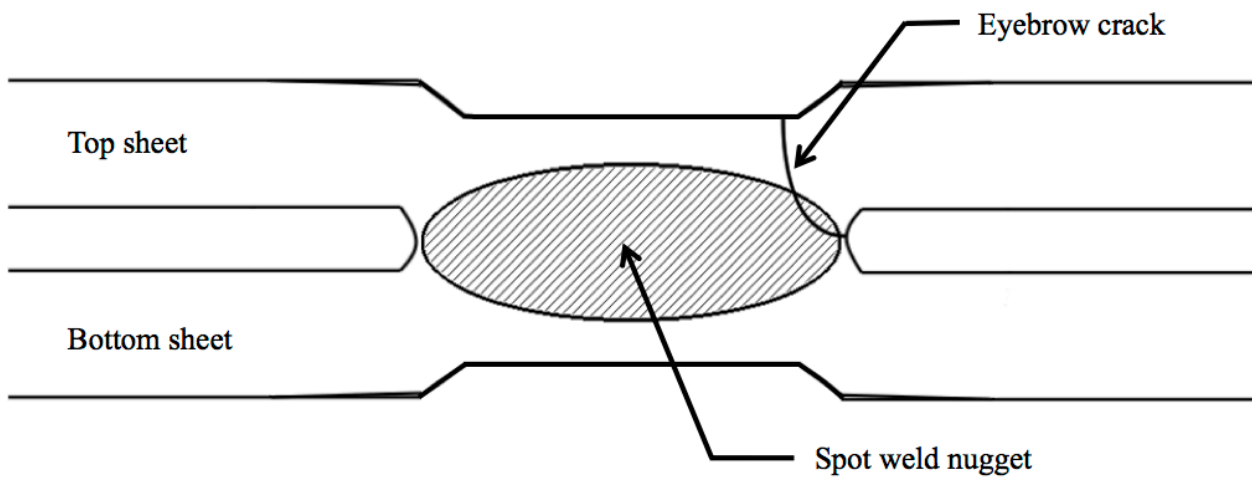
Schematic of an "eyebrow" crack, defined as crack initiation at the edge of the spot weld and propagation through the sheet thickness.
